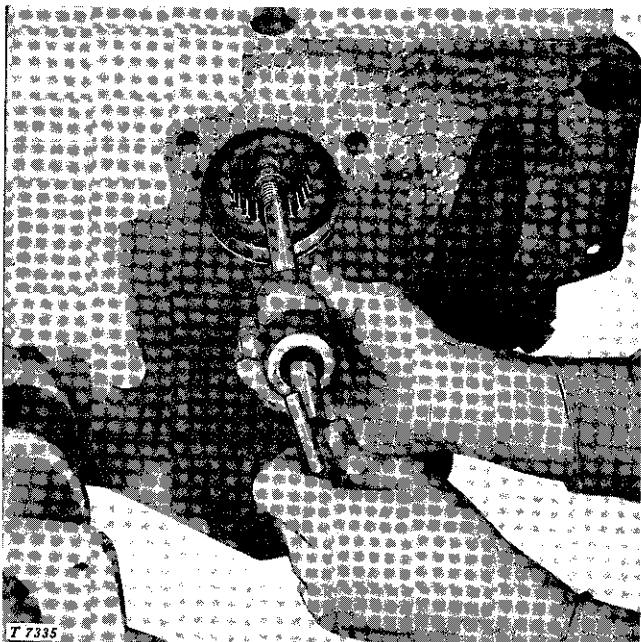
Removing Steering Clutch Drive Shaft
